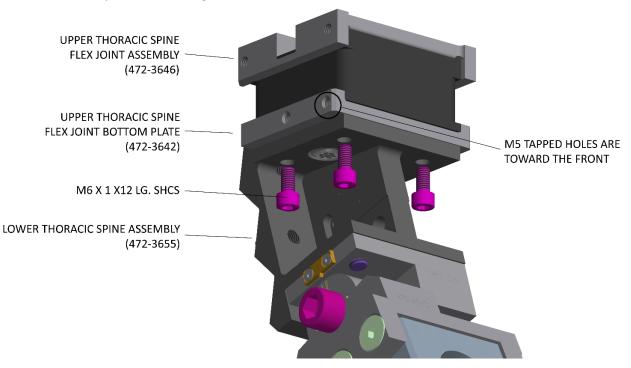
Upper Flex Joint Assembled to Lower Thoracic Spine Assembly
